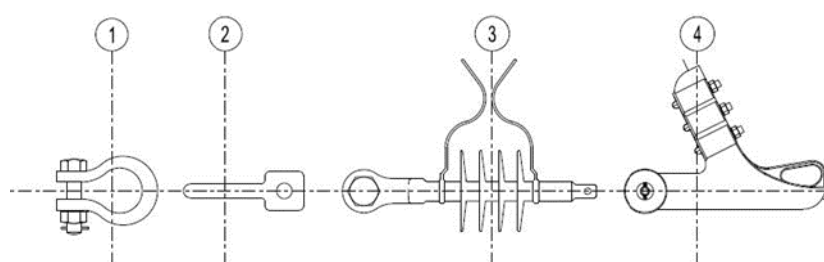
(Insulated Option) Shield Wire Strain Assembly for Single “7/3,35mm & 19/2.65”
